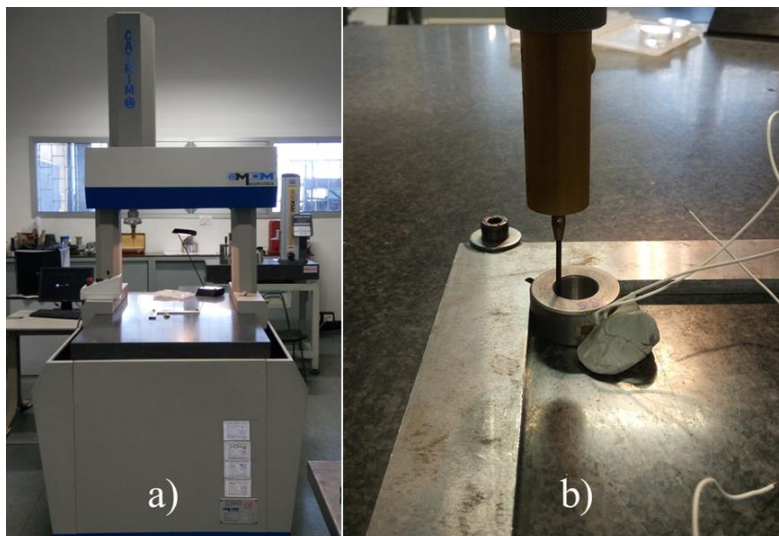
(a) Cartesian measurement machine used for hubs; (b) a detail of machine probe
